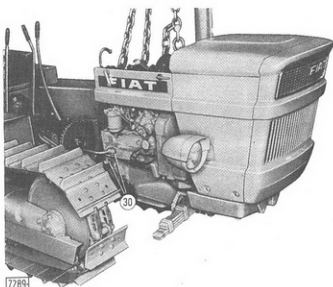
Removing (or Refitting) Engine/Front Suspension Unit using Lifting Chain Part No. 290740
